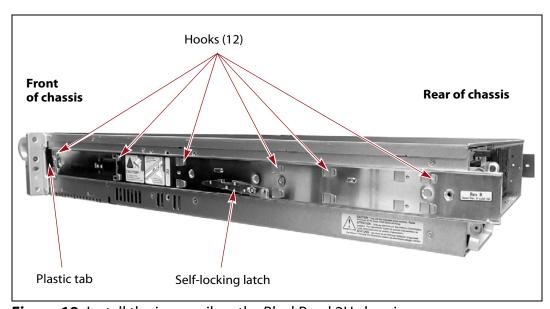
Install the inner rail on the BlackPearl 2U chassis.
